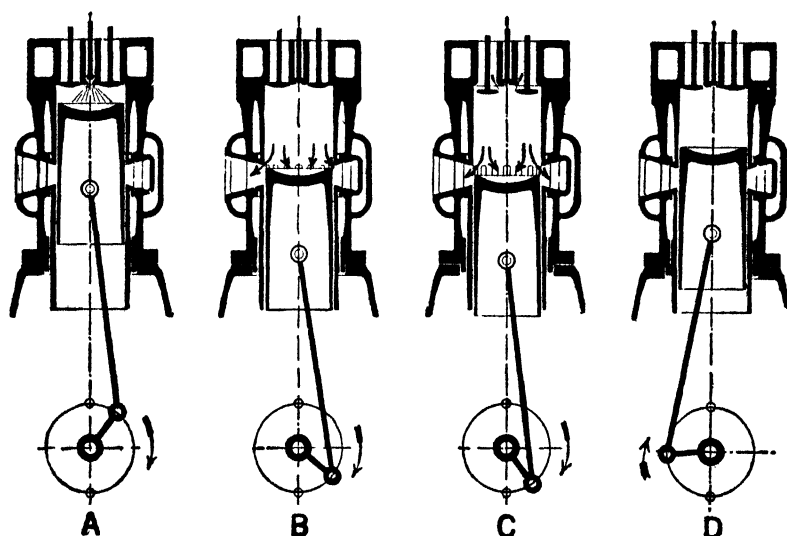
Overhead Valve Scavenging 2-Cycle Diesel Engine
